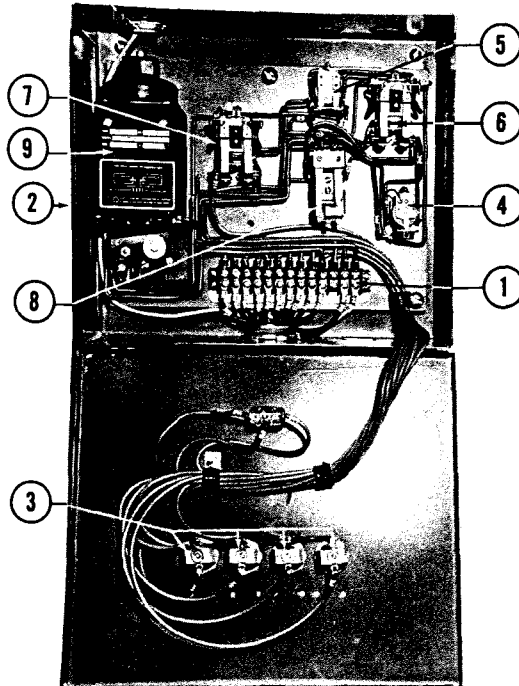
(REGULATOR MODULE SUB-ASSEMBLY. 1386)
